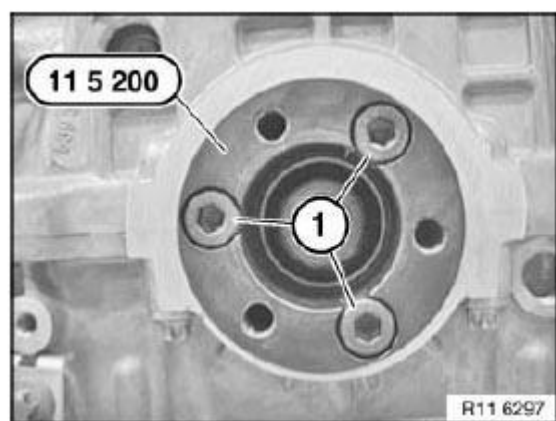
Identifying Screws With Special Tool (11 5 200)
